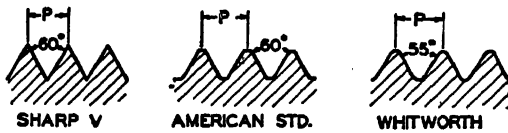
Screw Thread Profiles for Metal Fastenings.
